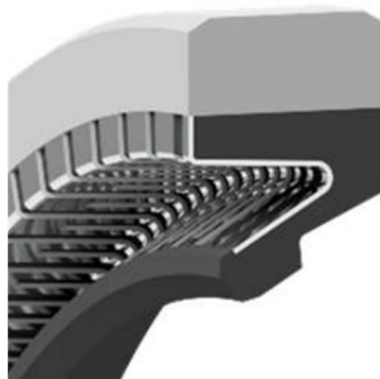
RWDR with an integrated finger spring on a main bearing (Ref.: CARCO GmbH)
